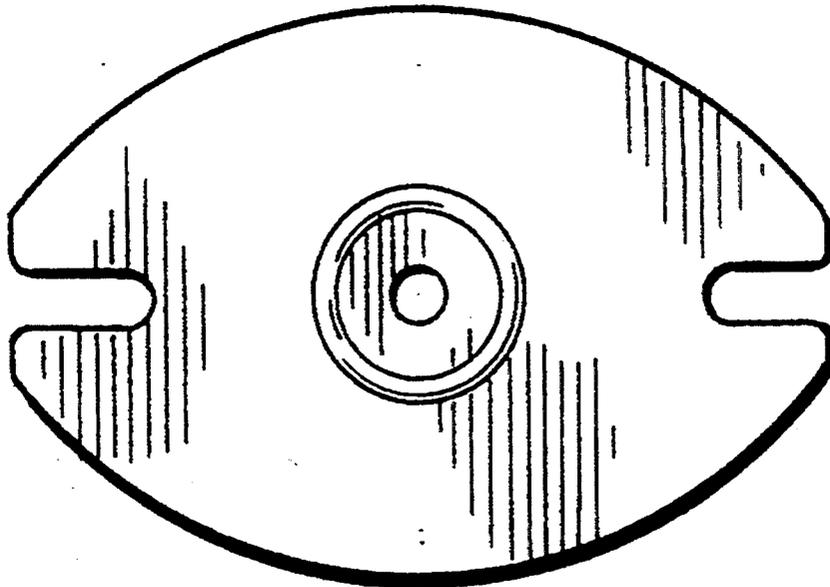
is a left side view of the RTD transmitter assembly of FIG. 1;
